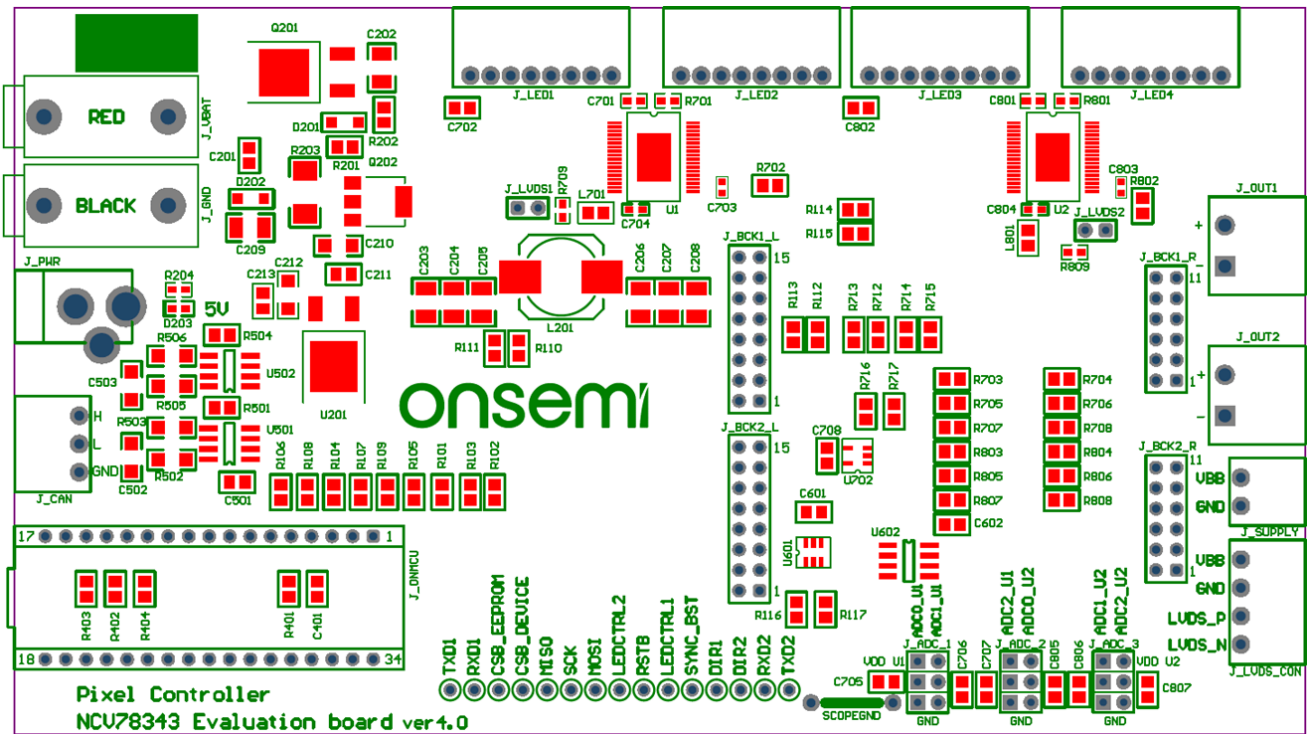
NCV78343R1GEVB Evaluation Board Assembly Drawing
